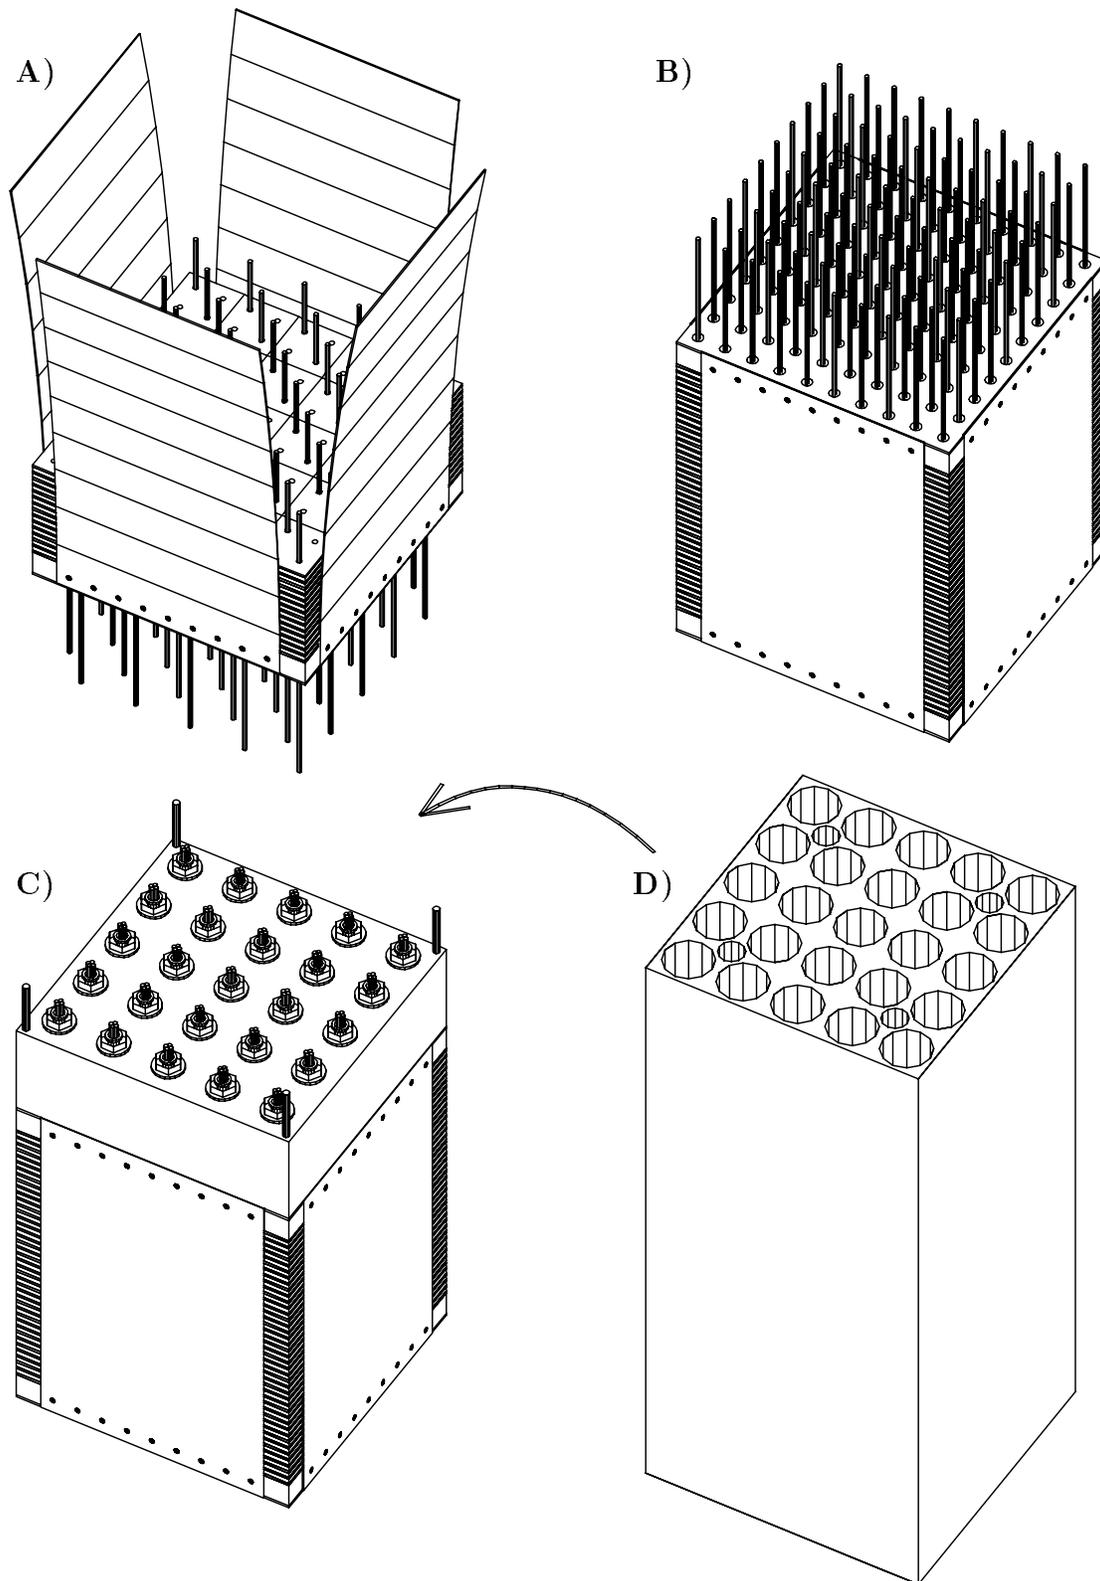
Assembly procedure of the inner module. (A)-stacking of the module; (B)-insertion of the WLS fibres; (C)-grouping the fibres into bundles; (D)-installation of the PM housing.
